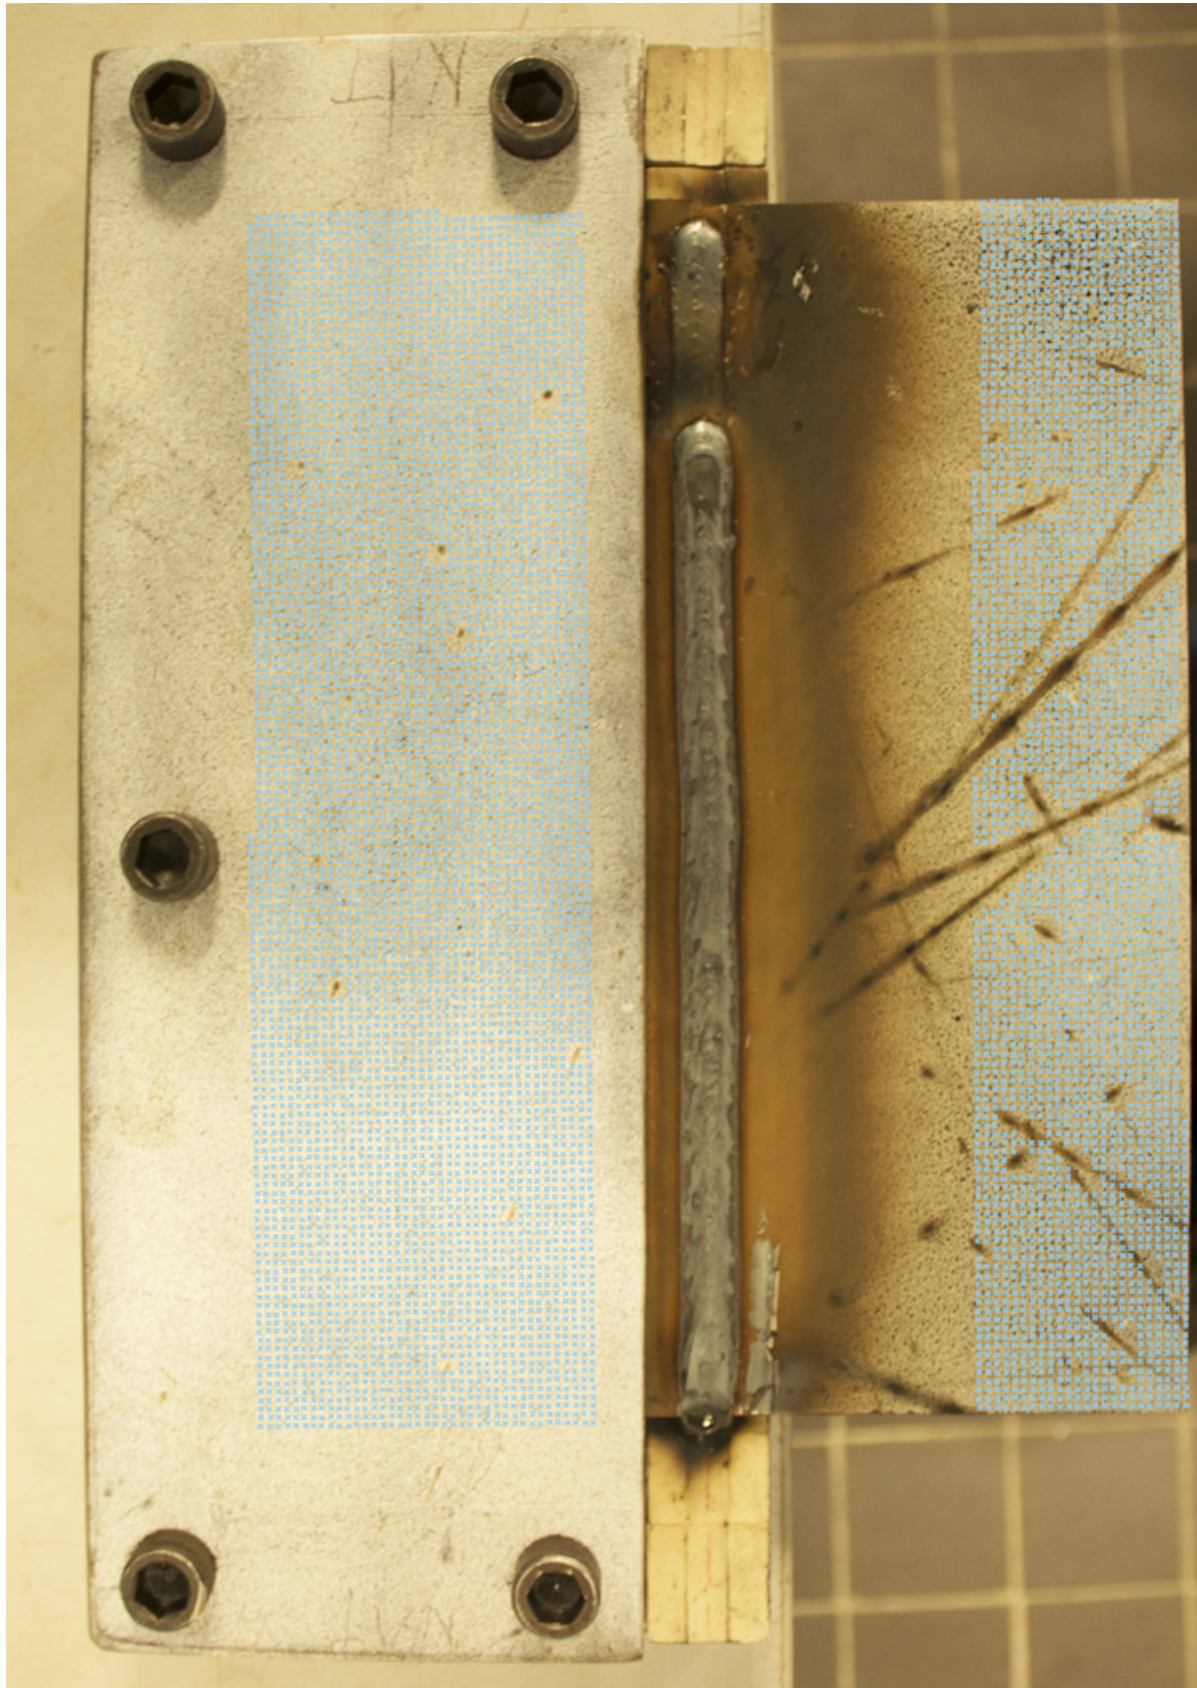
The DIC reference measurement point are depicted as blue crosses on the plate. Close to the weld the paint is burned due to the increase in temperature. Further from the weld, traces of weld metal shot off during the welding process can be found, leaving a burned or discoloured trail of paint.
